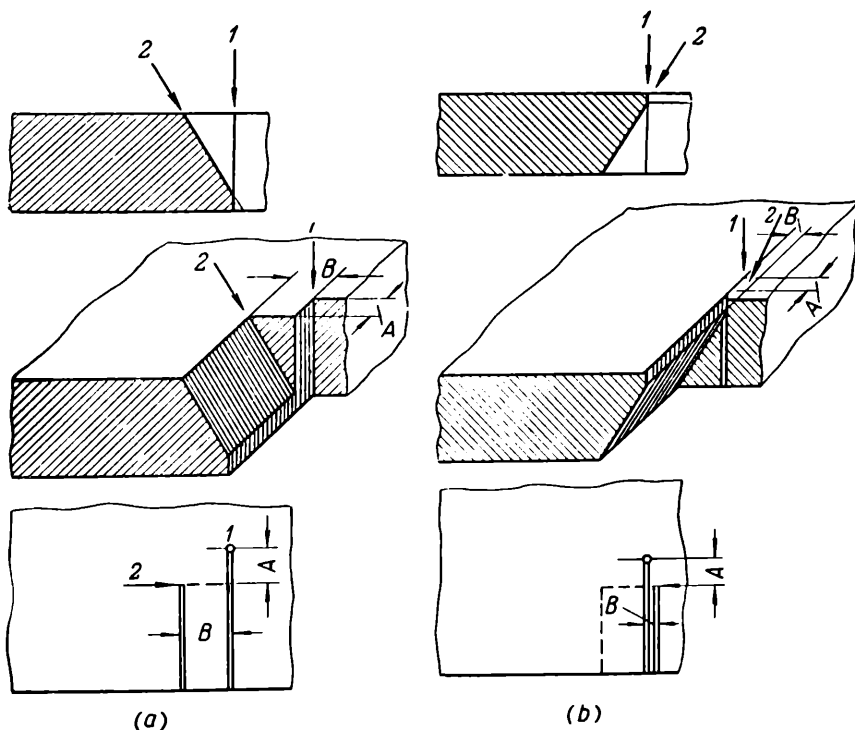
Single-bevel cutting with two torches, 1 and 2: a — 1st technique; b — 2nd technique
